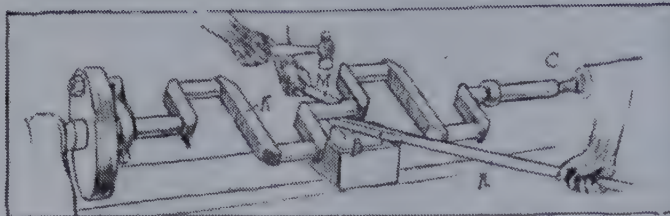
Showing Method of Straightening a Bent Crankshaft
